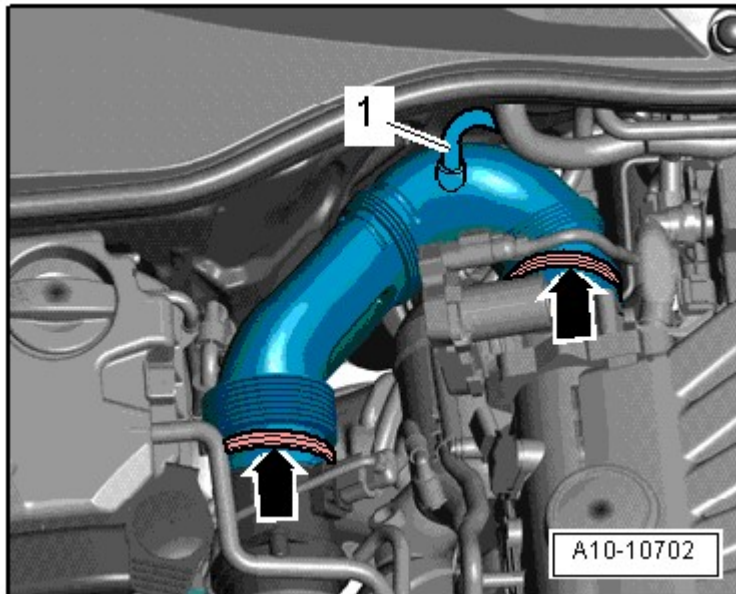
Identifying Air Guide Pipe And Vacuum Hose
